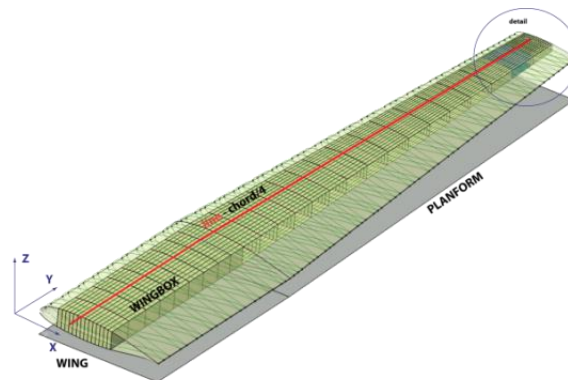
Wing Surfaces and Wing-box Structural Layout and planform
